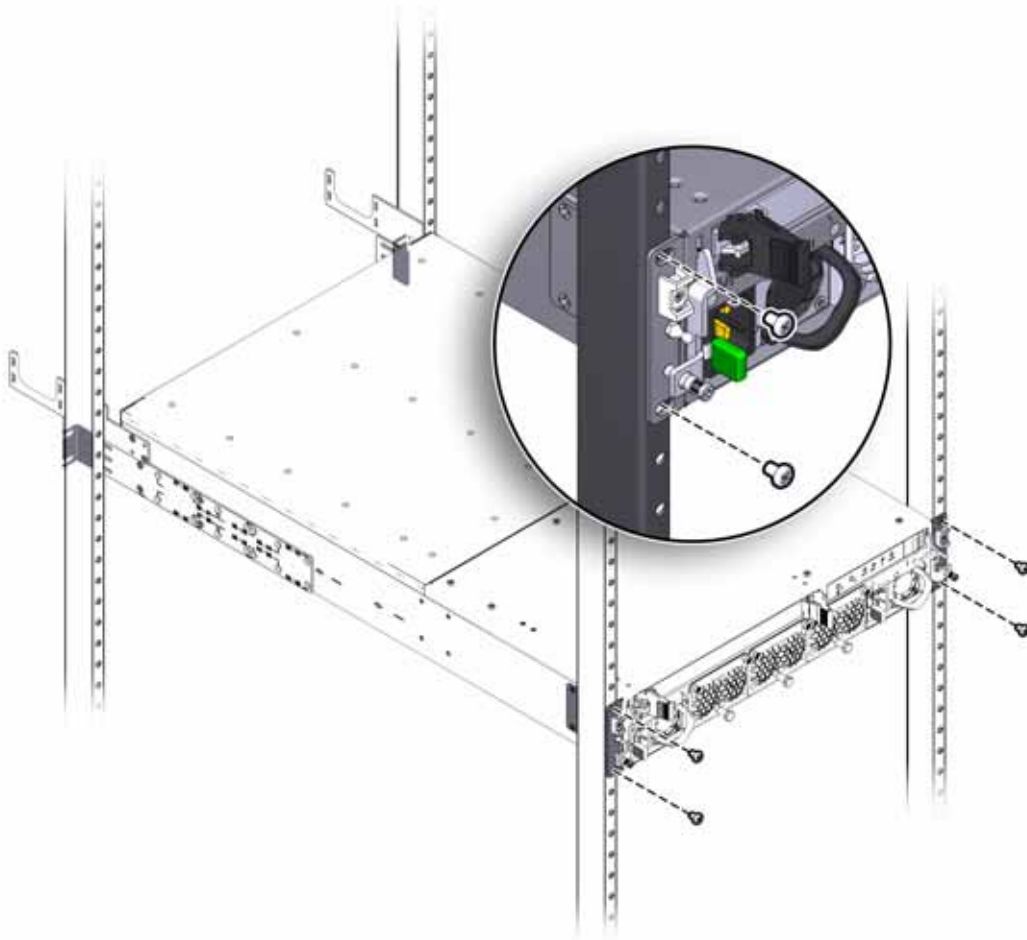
Securing the Front Mounting Brackets to the Equipment Rack
